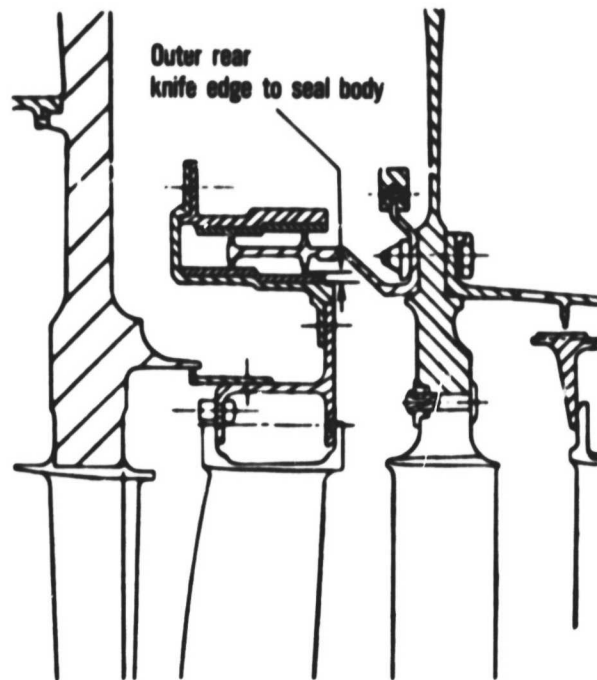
Low-Pressure Turbine X-ray Locations - 3rd Stage Inner Air Seal. (J23499-20)
